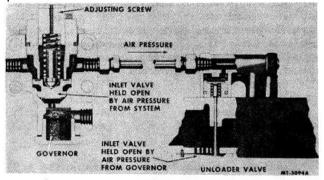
Governor and Unloader Valve in Pumping Cycle
